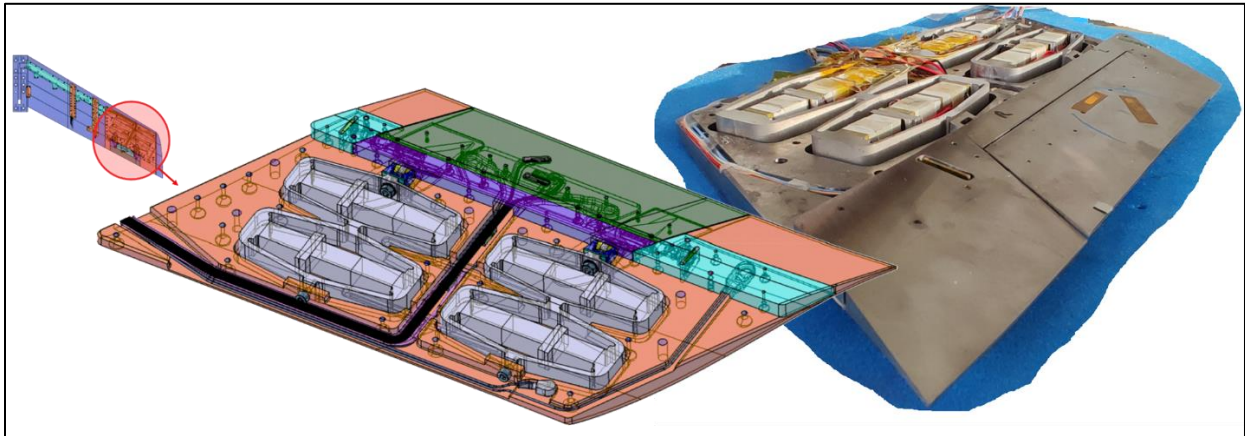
Outboard wing and external aileron (CAD view– Manufactured Parts)
